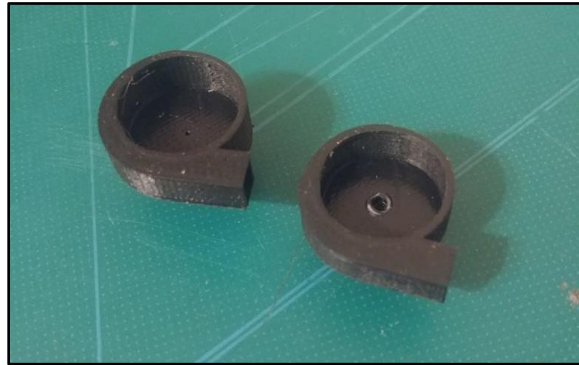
Testing Apparatus for the Impeller Pump (Right with Hole Drilled)
